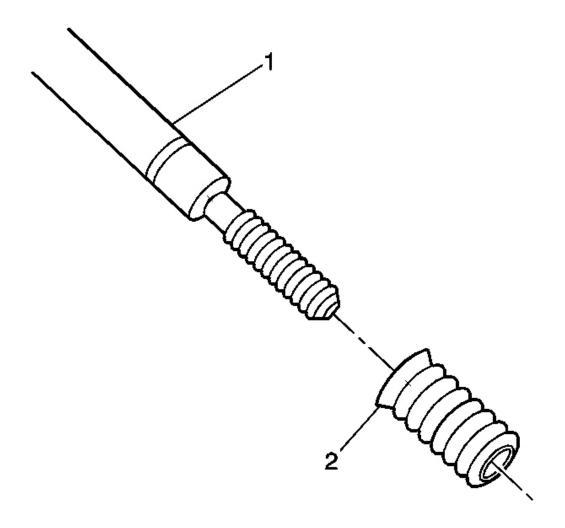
View of Bushing Type Insert Courtesy of GENERAL MOTORS CORP.
